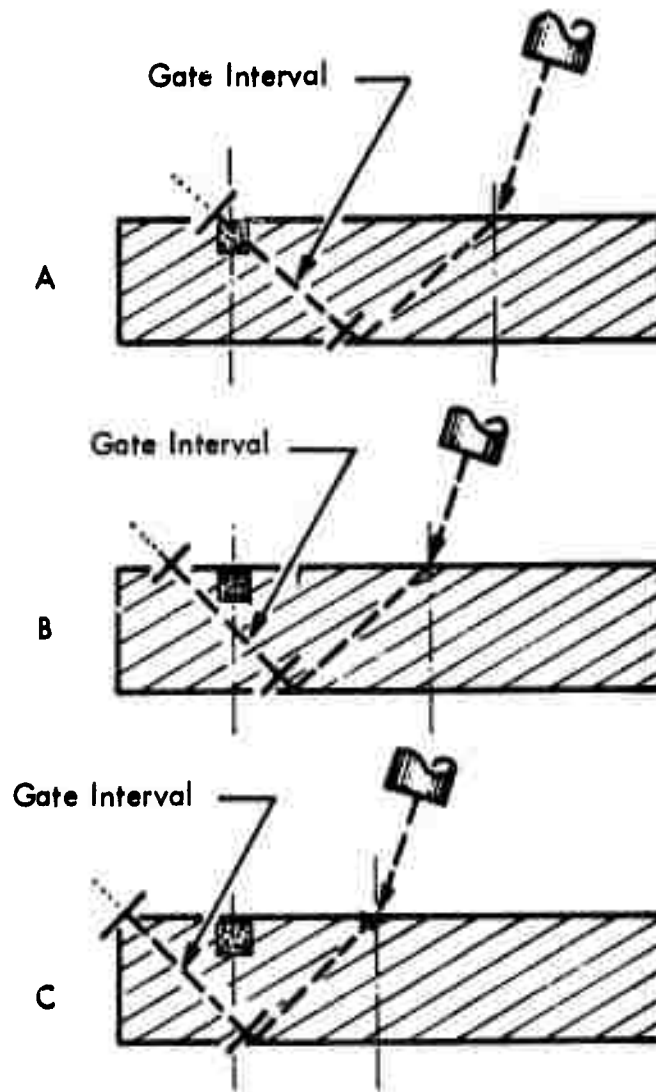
CONVENTIONAL WELD SCAN
